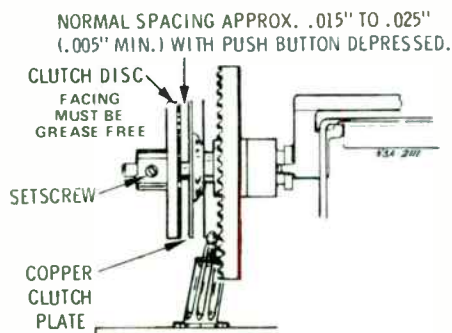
CLUTCH ADJUSTMENT DETAIL
